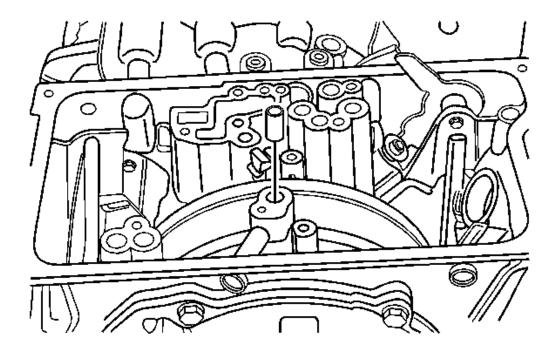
1-2-3-4 and 3-5 Reverse Clutch Plates Component View Courtesy of GENERAL MOTORS CORP.
